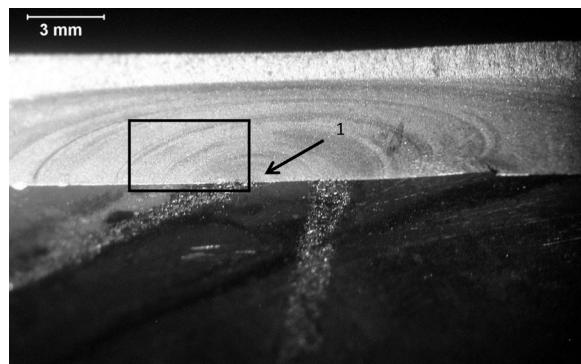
Fatigue fracture with beach marks and origin [1] in place where the inscription (number "1") was made with engraving tool. Stereomicroscopy.
